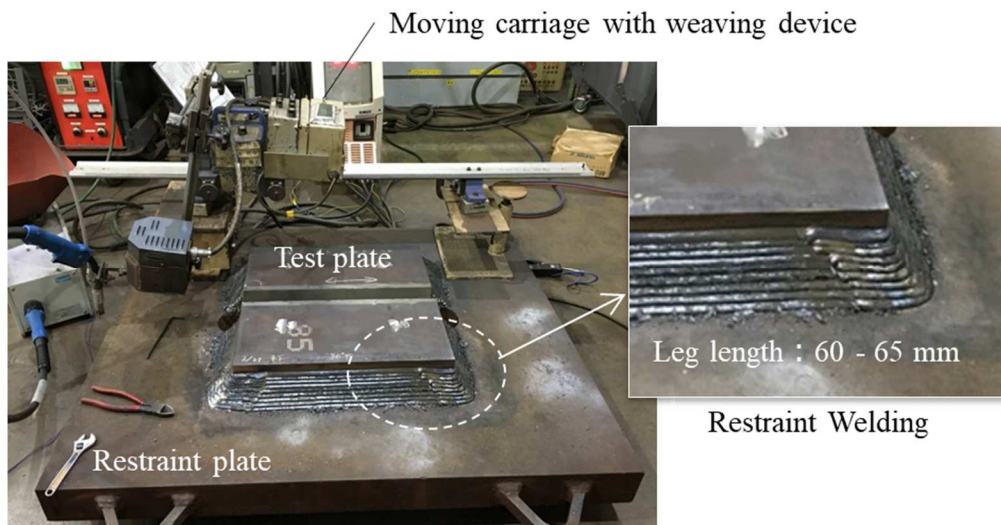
Appearance of test plate after restraint welding
